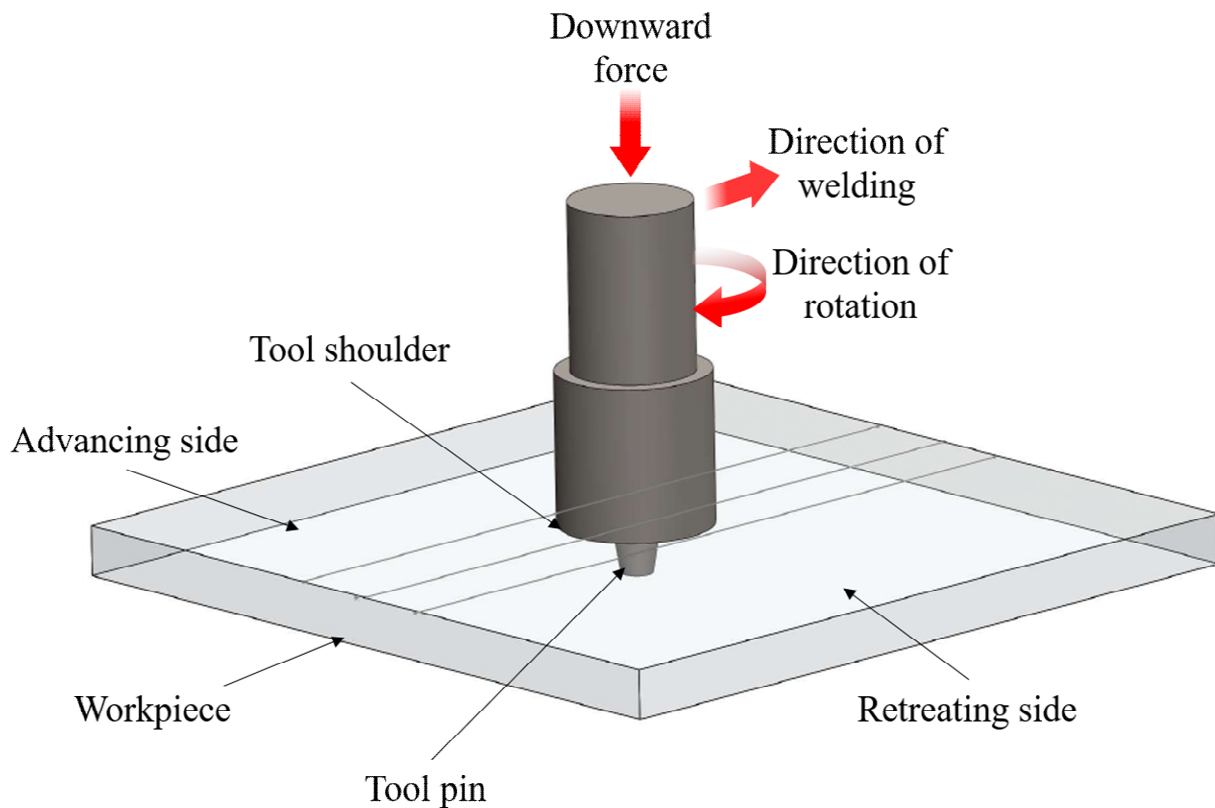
Schematic drawing of friction stir welding.
